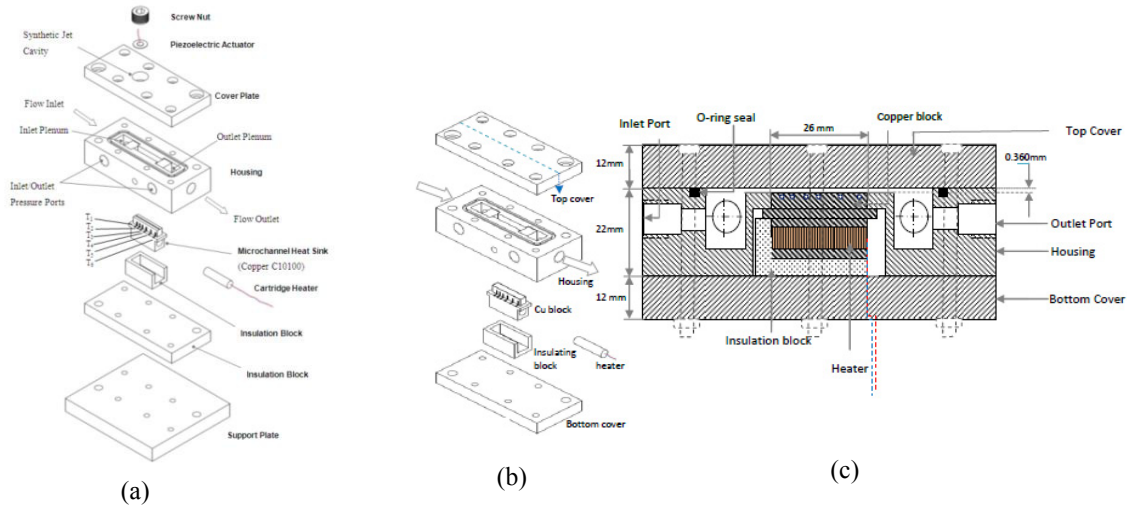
Schematics of the test section. (a) exploded view of the test section used for synthetic jet experiment. (b) exploded view of the test section used for surface morphology modification test. (c) Sectional view of the test section.
